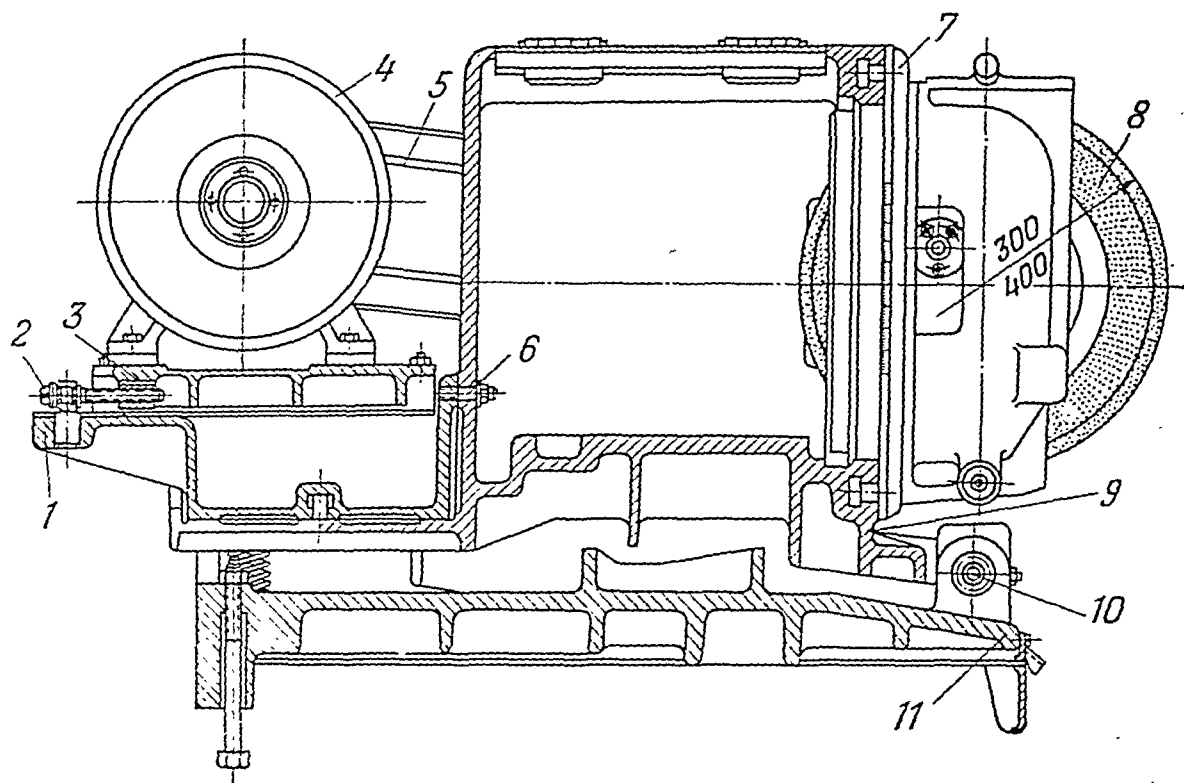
Wheelhead of the thread grinder, model 5E82:
